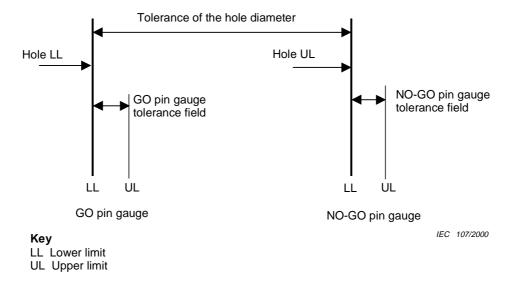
Pin gauging tolerance field of ferrule hole
